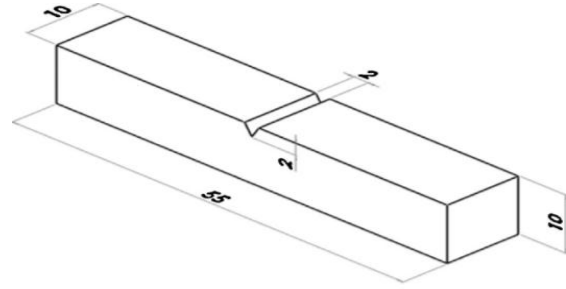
Schematic view shows the dimensions of Charpy v-notch test.
